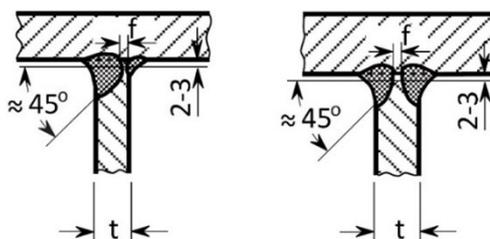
Single and double-bevel welds with defined incomplete root penetration
